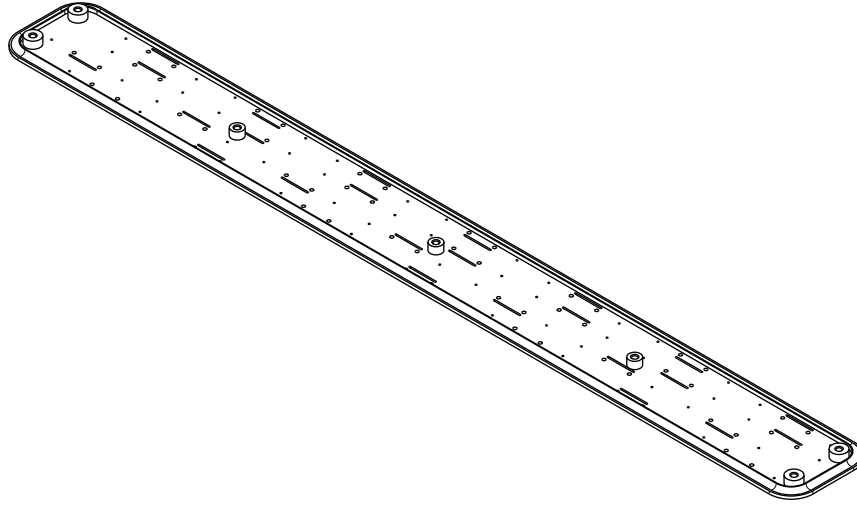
Isometric view of the prototype cooling plate. The cooling pipe, alignment fixtures, and slits for routing of kapton tails are shown. The overall dimensions of the plate are 564 mm  $\times$  60 mm.
